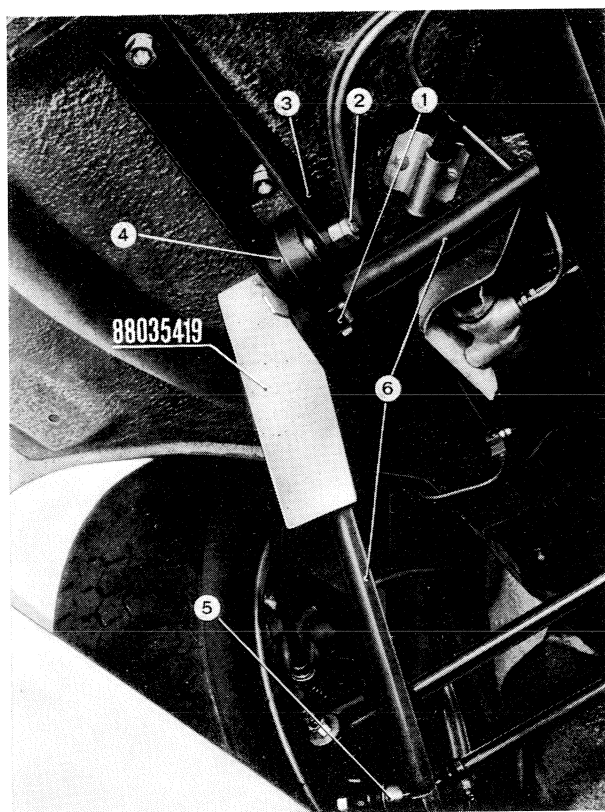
2/11 - Rear Stabilizer Bar Front Mounting
